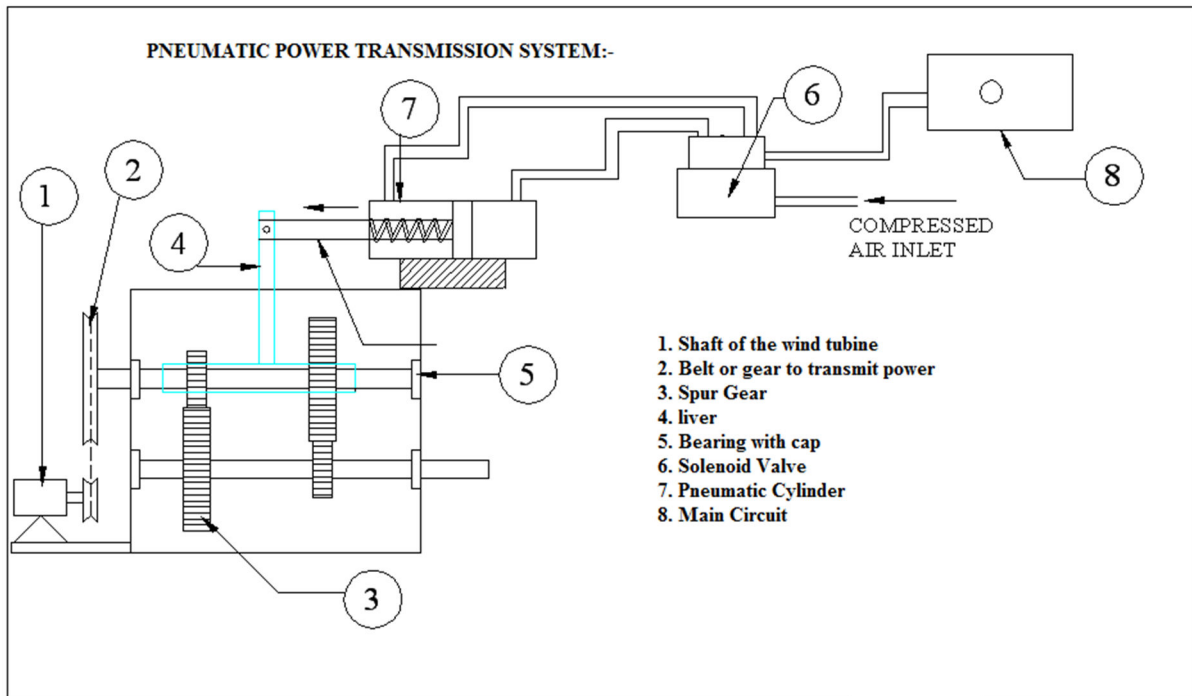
Pneumatic Diagram of Automatic Gear Shifting Mechanism [24]
